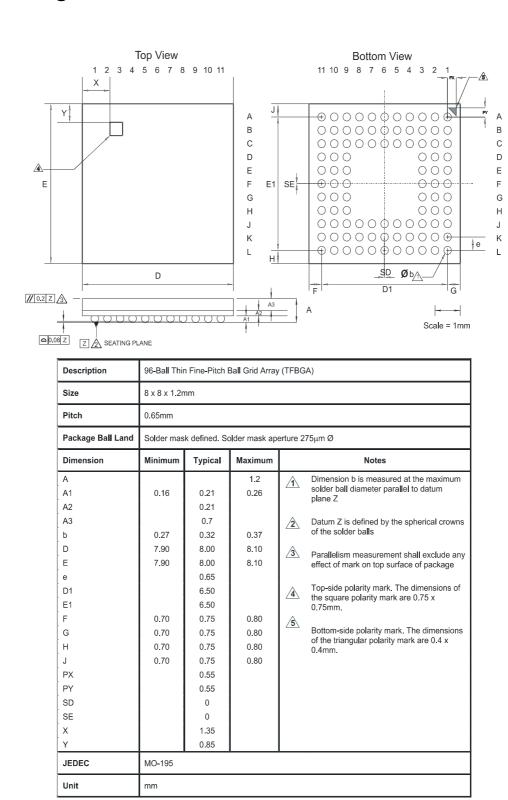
8 x 8 x 1.2mm TFBGA 96-Ball Package
